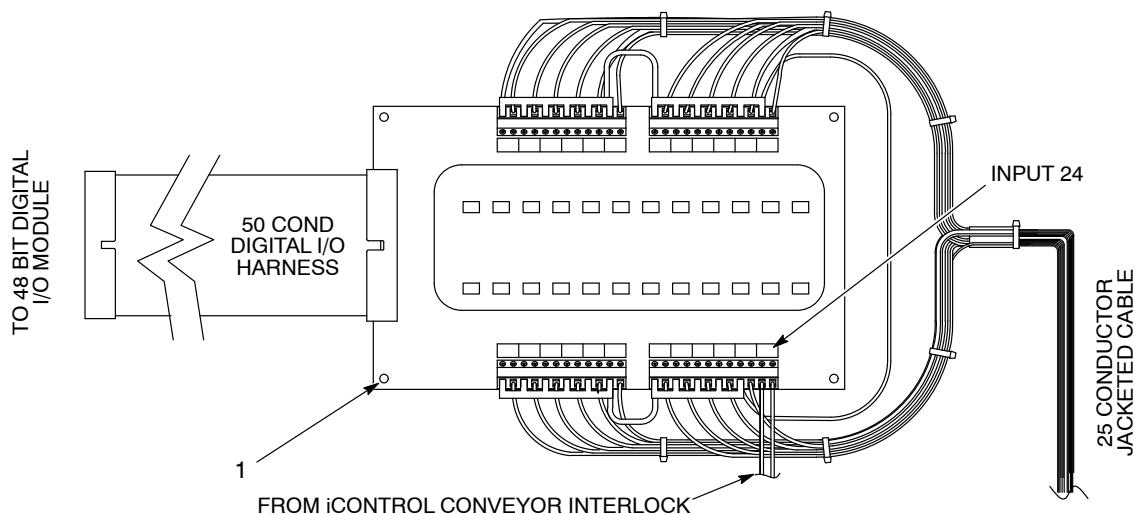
Old Interface Card with Wiring and Ribbon Cable Connections
